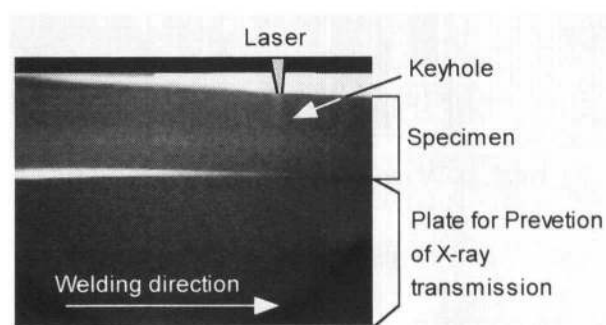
Typical X-ray transmission image of full penetration welding of stainless steel.
